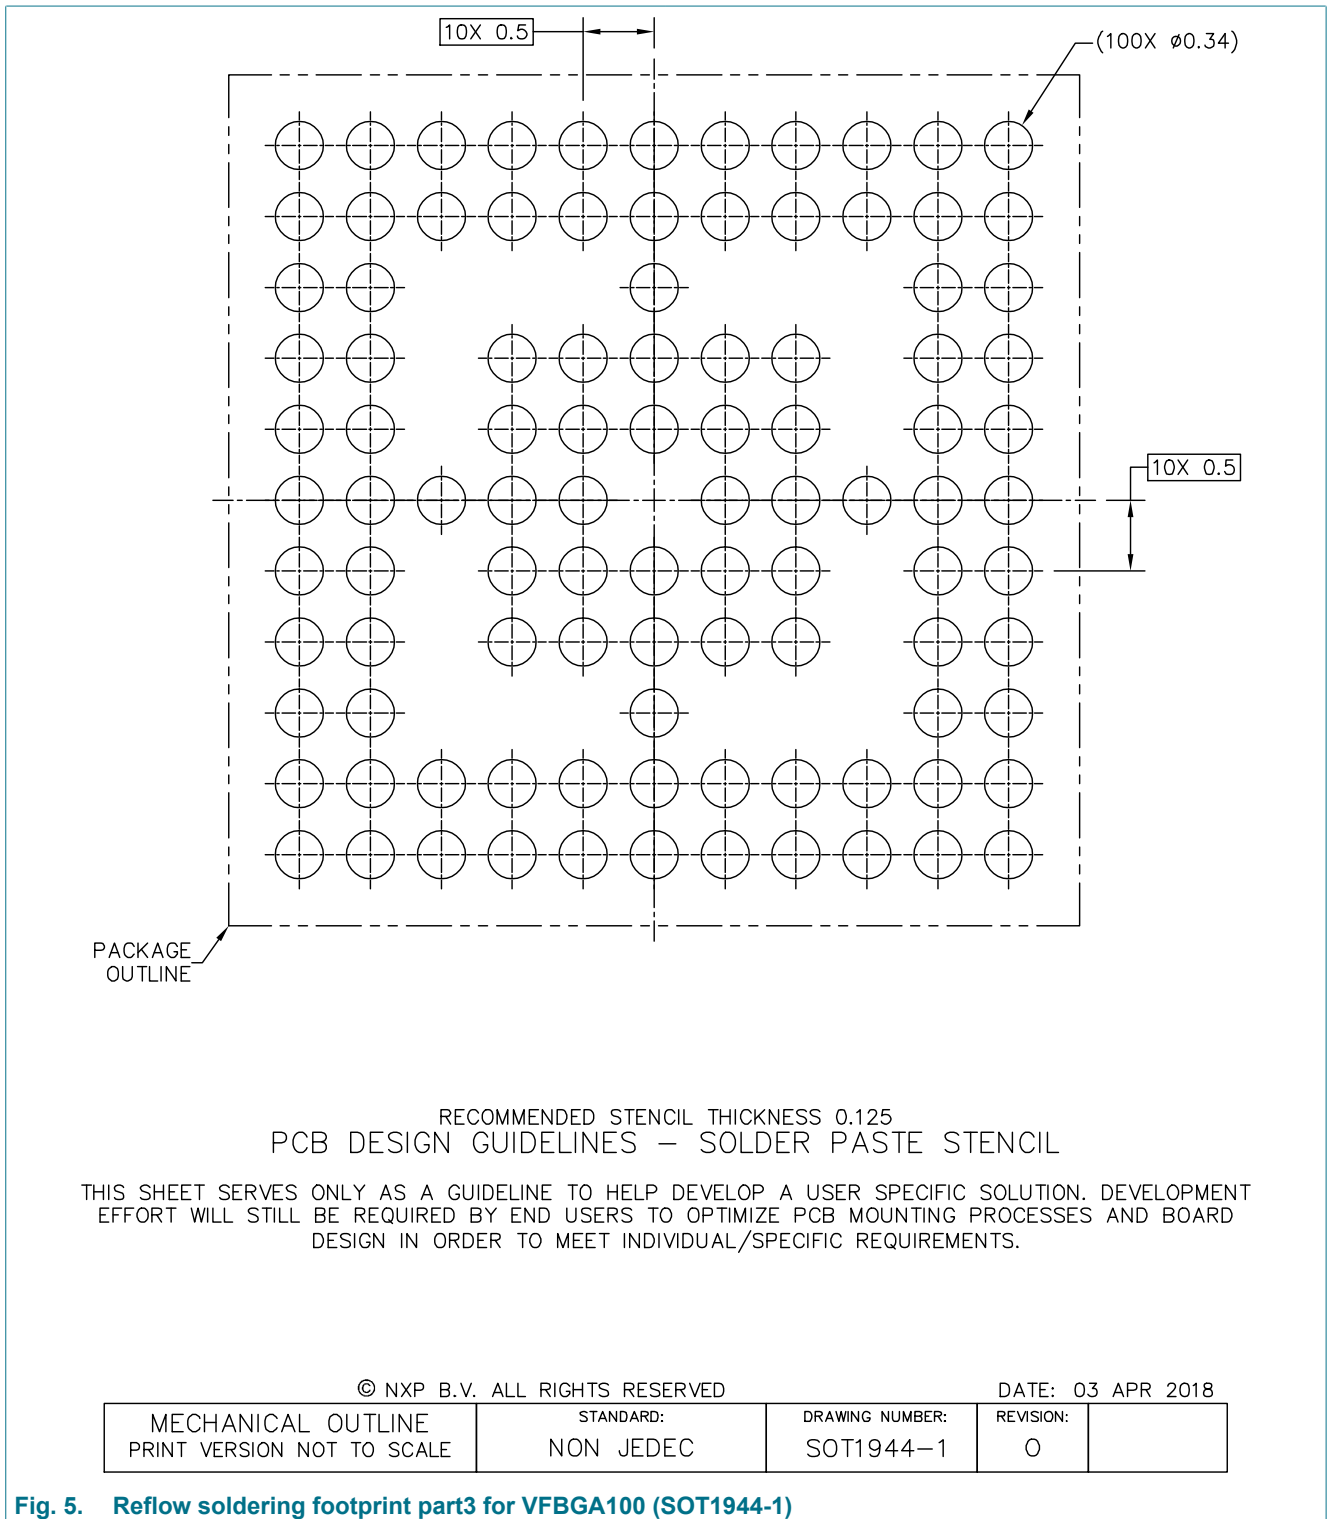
Reflow soldering footprint part3 for VFBGA100 (SOT1944-1)
